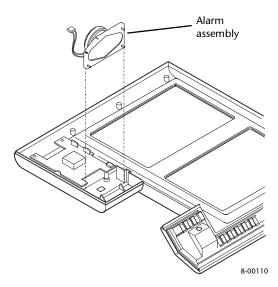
Replacing the 9.4-inch GUI alarm assembly
